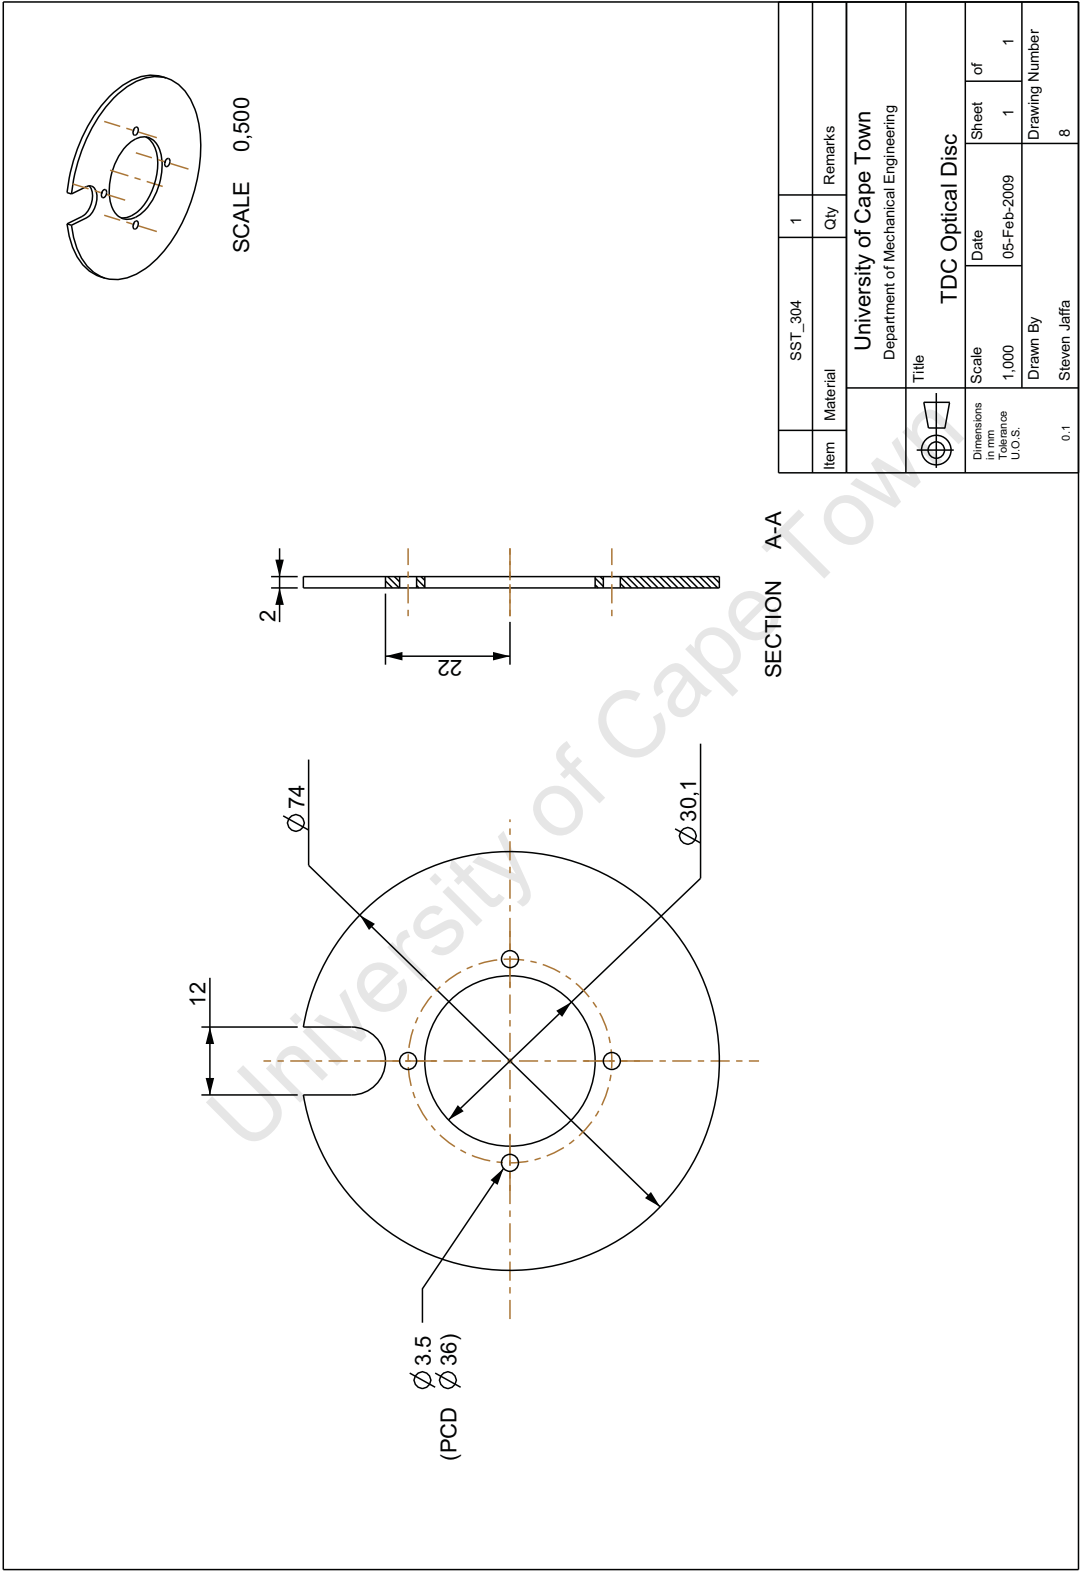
Manufacturing Drawing: TDC Optical Disc.
